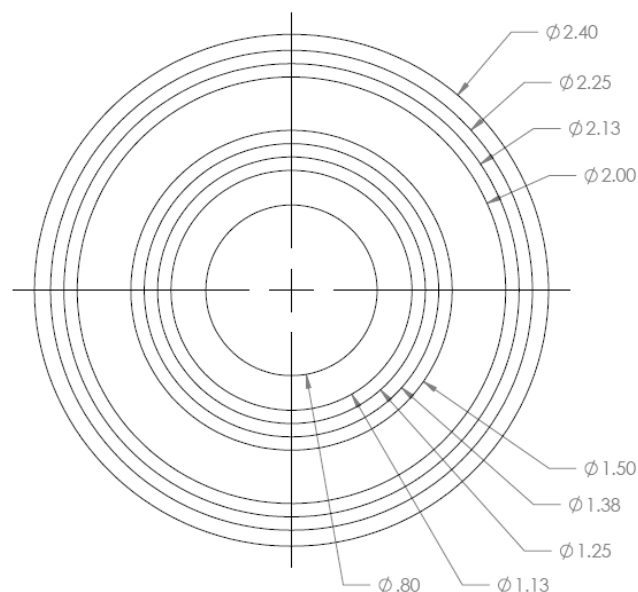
Detailed schematic of the hot-face seal housing. All dimensions are in inches.
